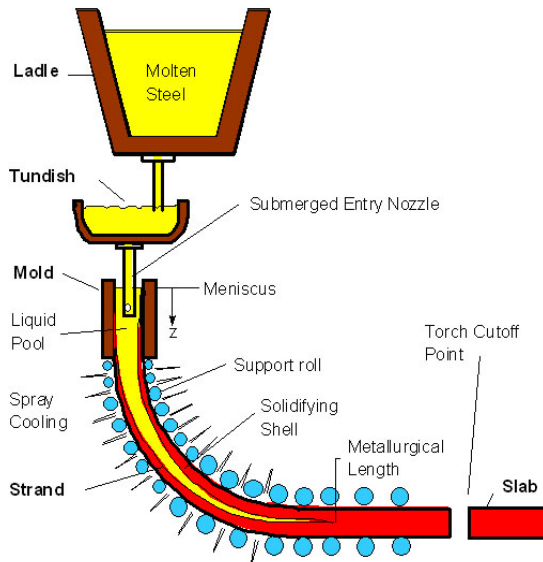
Schematic of Steel Processing including ladle, tundish, and continuous casting
